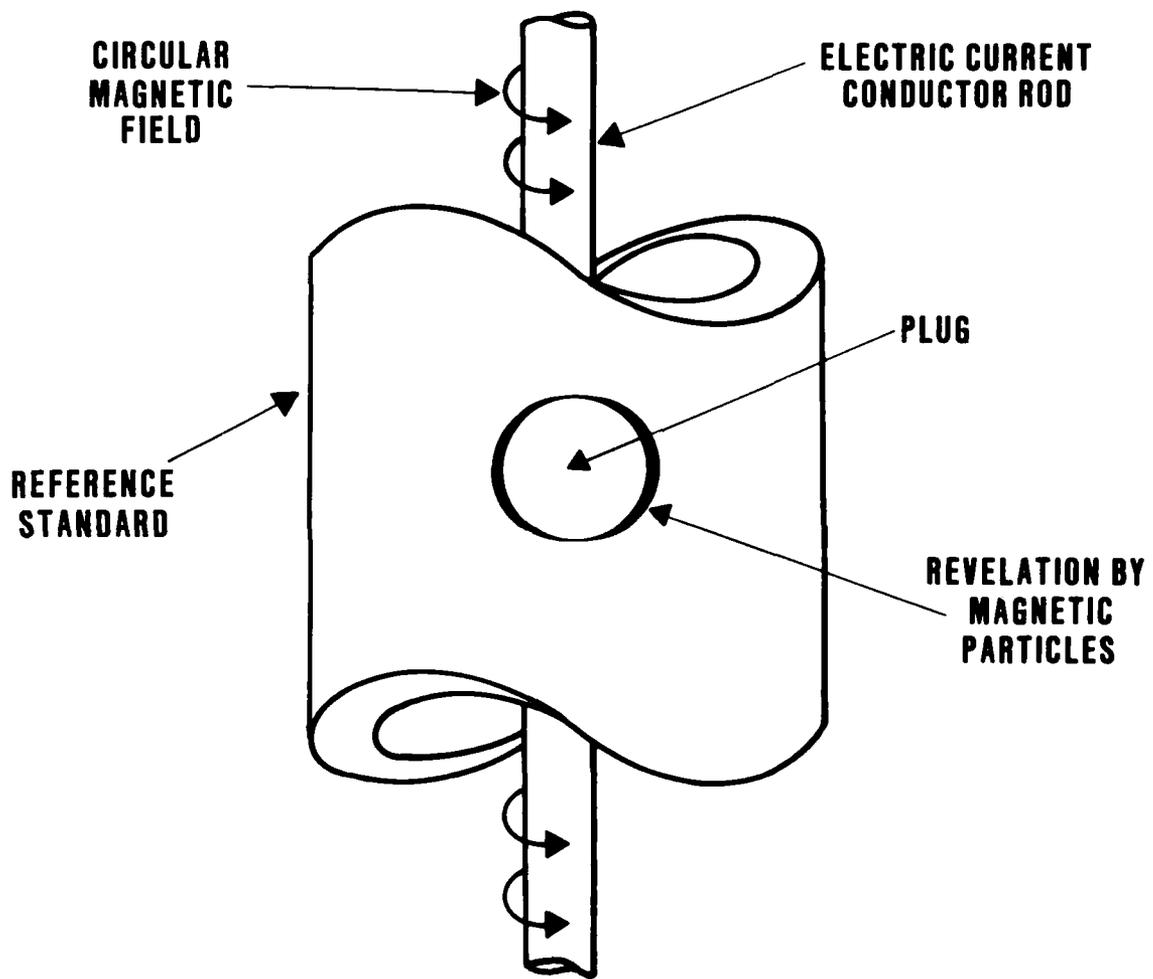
Plug inserted in a tubular shaped steel part making a reference standard for a magnetic particle test
